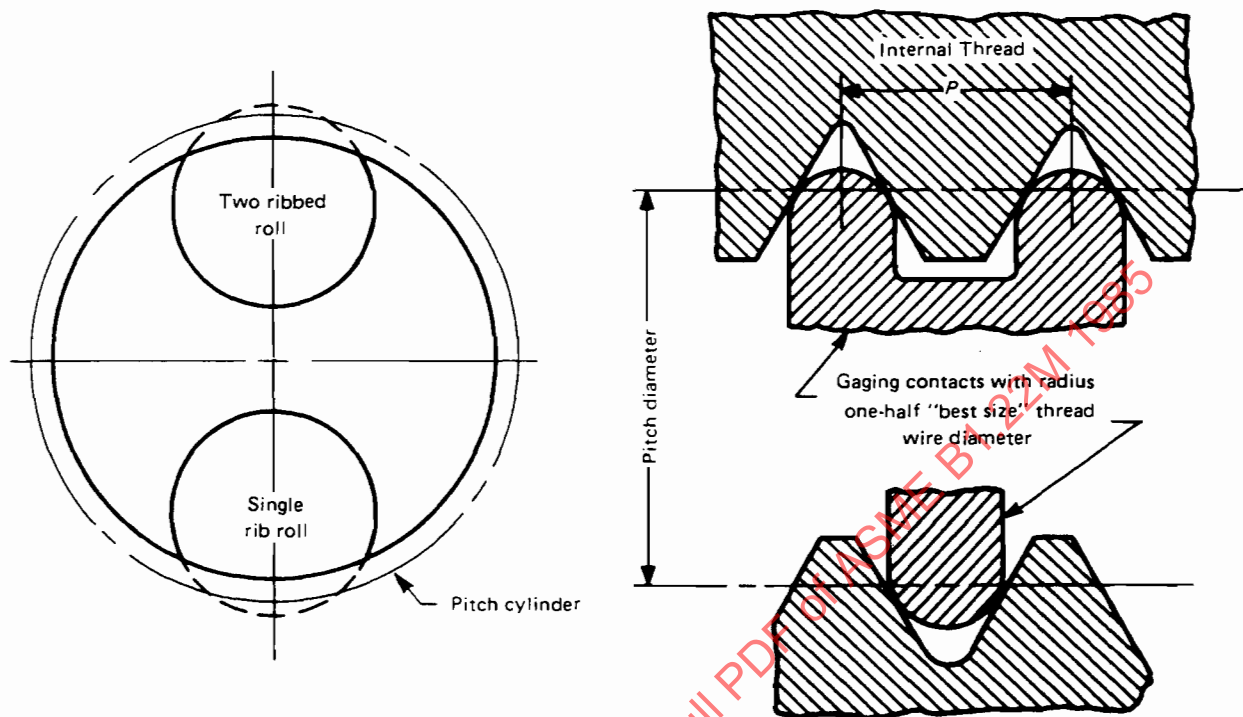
THREAD SNAP GAGES — MINIMUM-MATERIAL THREAD-GROOVE DIAMETER LIMIT
